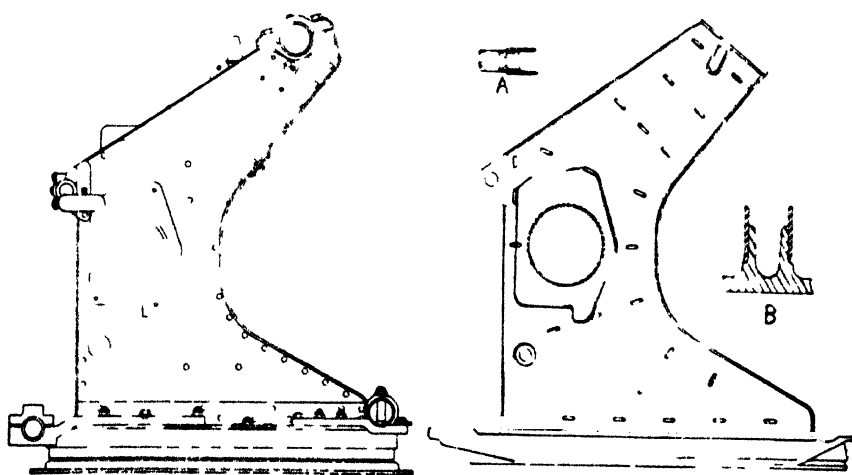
(left). A line drawing indicating the general features of construction of the riveted top carriage. Fig. 30. (right). A line drawing indicating the general features of the construction of the welded top carriage.
